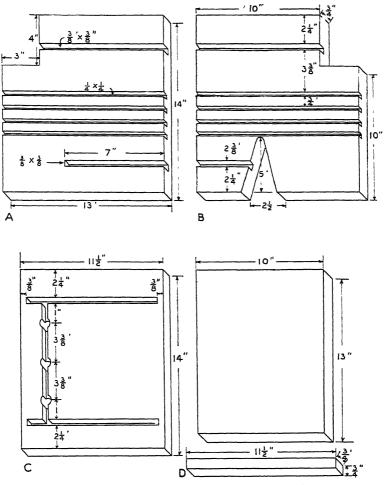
Detailed drawings showing the dimensions and construction of certain parts of the photographic light box A, Frout, B, back, C, left side, D, bottom
